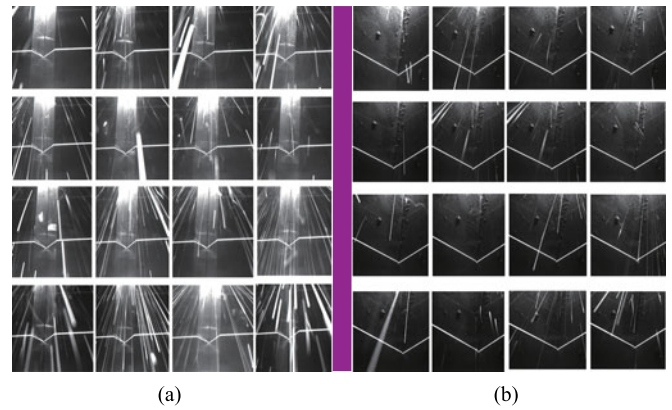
Parts of (a) V groove welding and (b) angle welding images.
